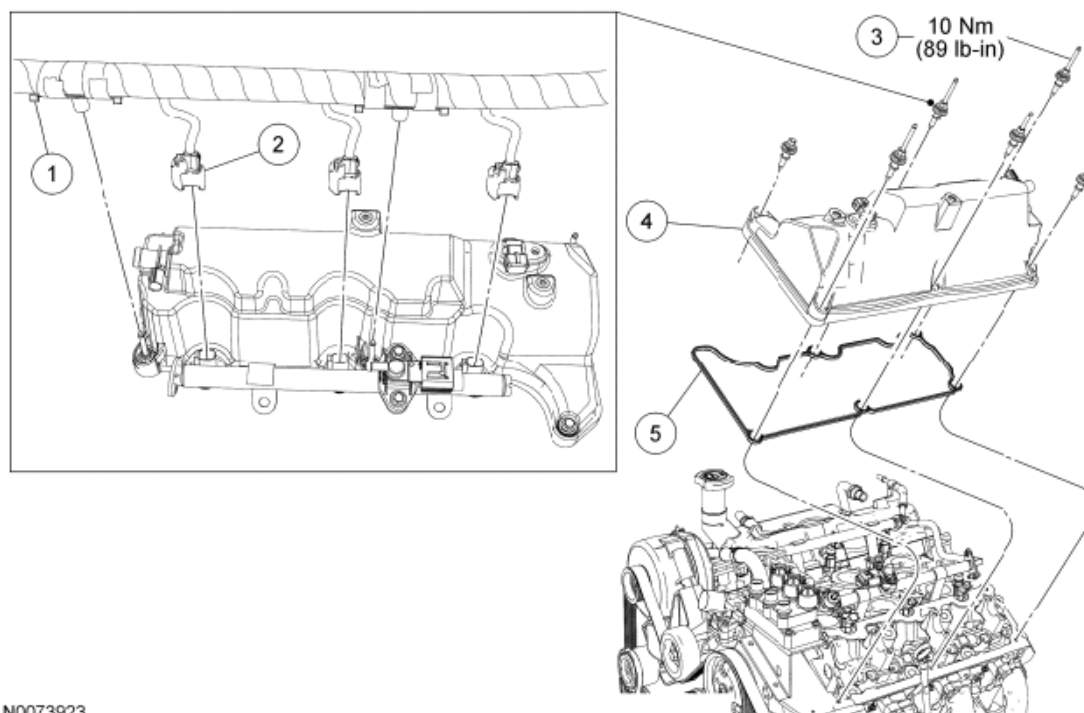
Identifying LH Valve Cover Components (1 Of 2)
